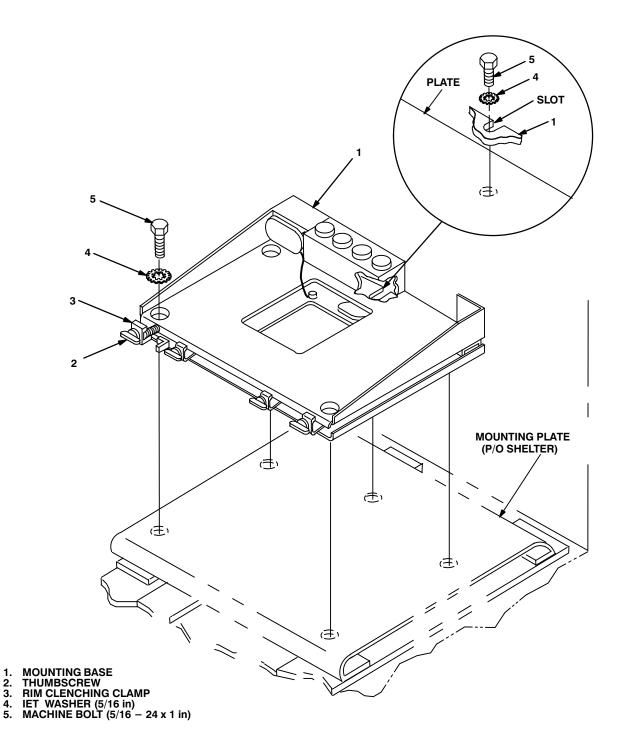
Mounting Base Installation: Front Curbside Wall
